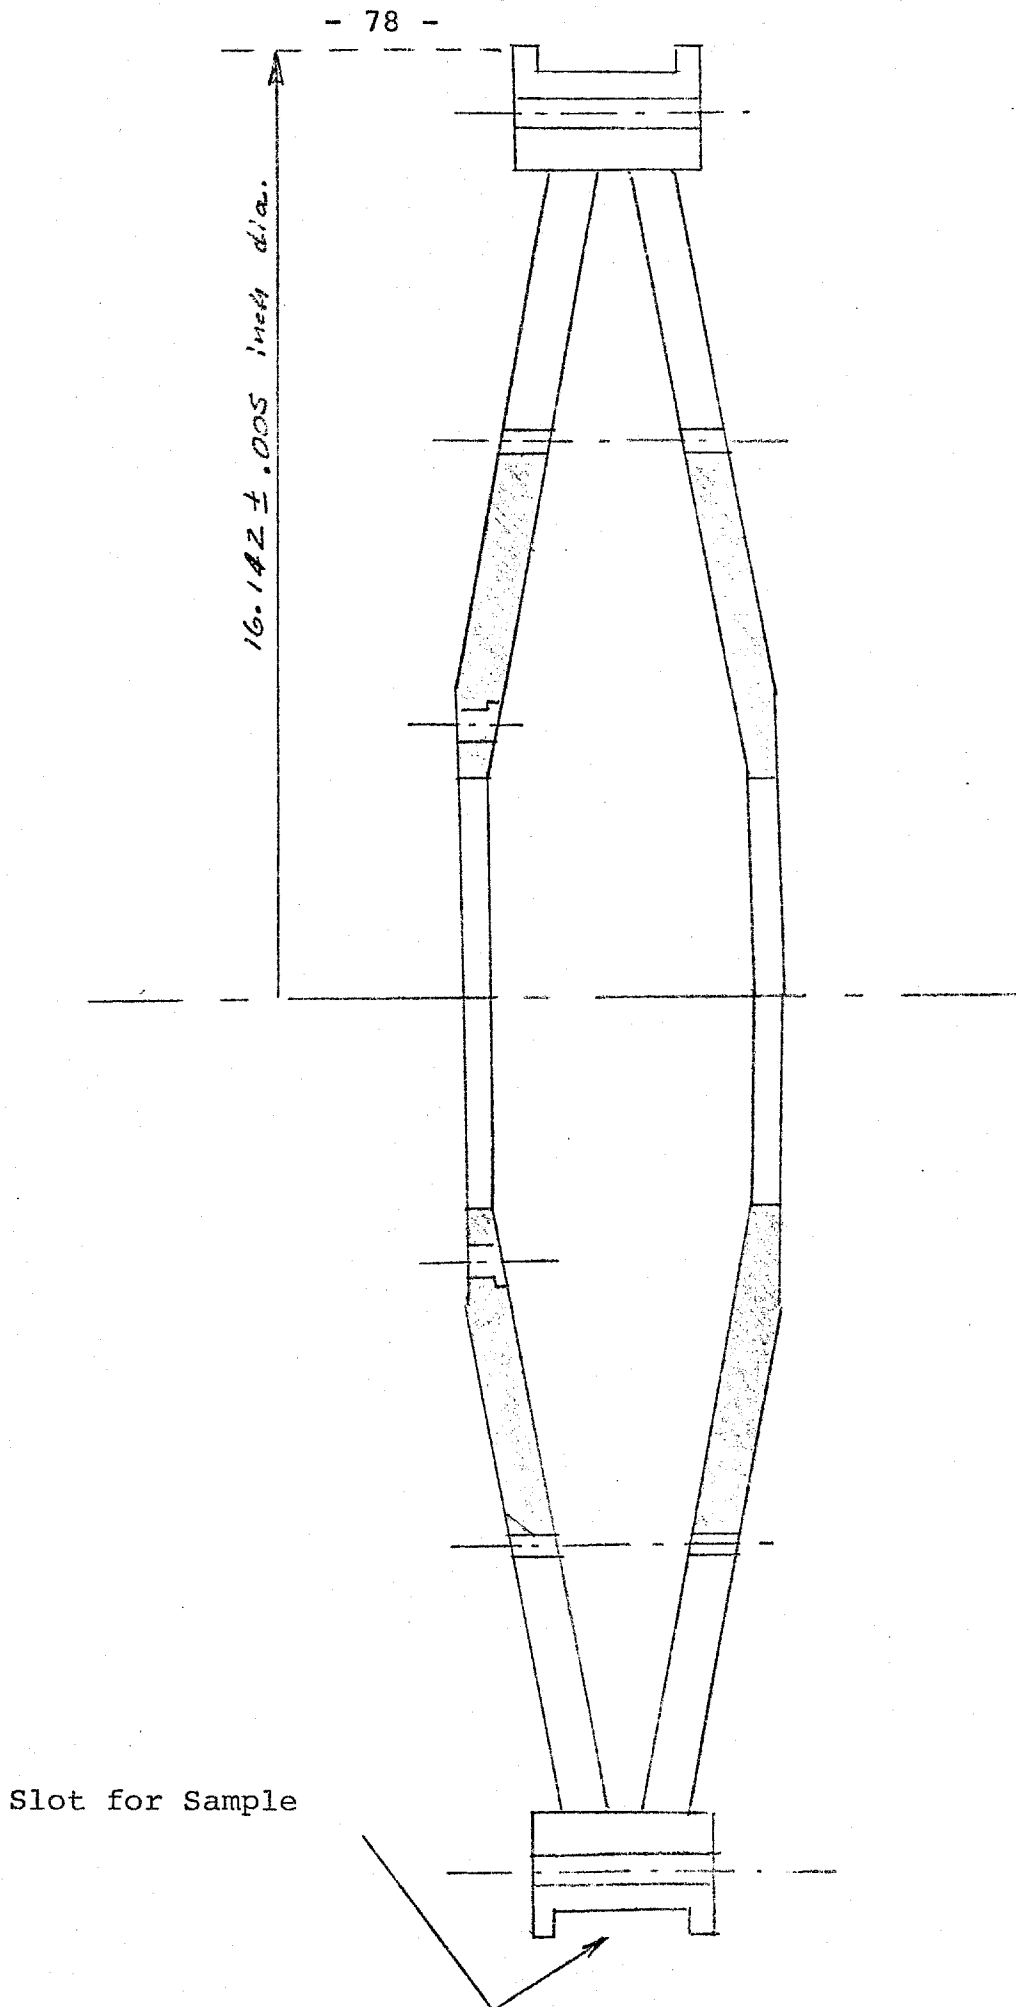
University of Wisconsin Test Apparatus, Details
